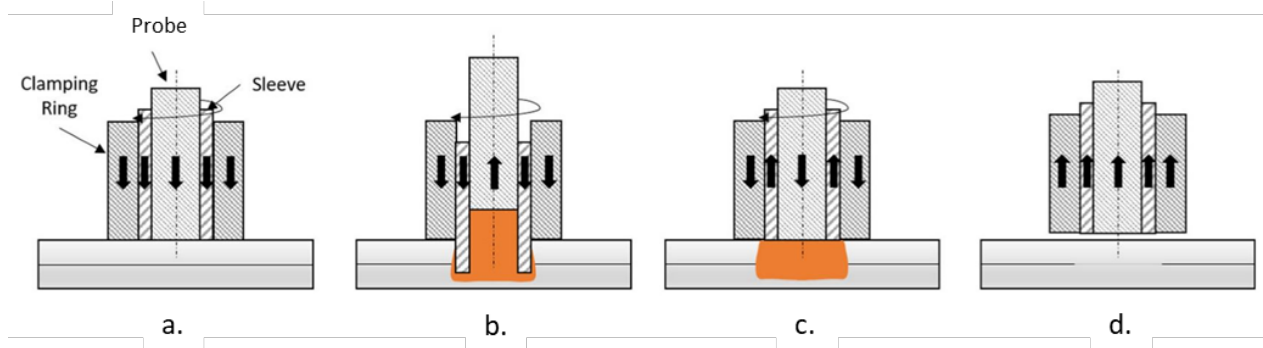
Schematic diagrams of refill FSSW process [9]. Positioning of the tool on the sheets (a), plunging of the rotating sleeve and retracting of the rotating probe (b), movement of the rotating sleeve and probe to initial position (c) and tool removal from the weld (d).
